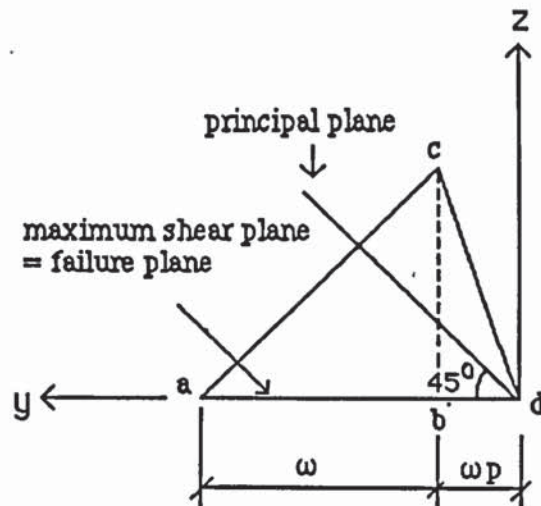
Predicted failure plane for a weld taking account of any penetration value.
